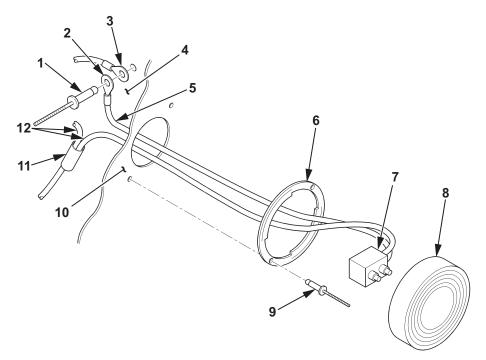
Upper Rear Marker Lamp Assembly Removal and Installation.
